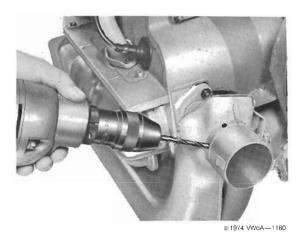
Spot welds being drilled out. Centerpunch the welds first.
